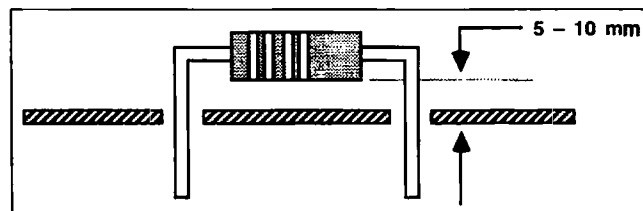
Power resistors (1 watt and up) should be mounted off the board surface.
